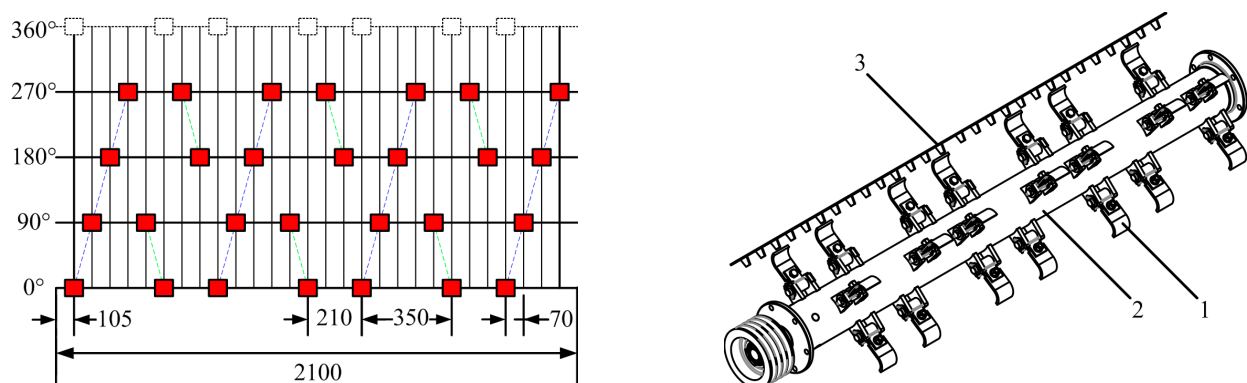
Schematic diagram of the array of cutter blades: 1. Cutter blade; 2. Cutter shaft; 3. Fixed blade.
